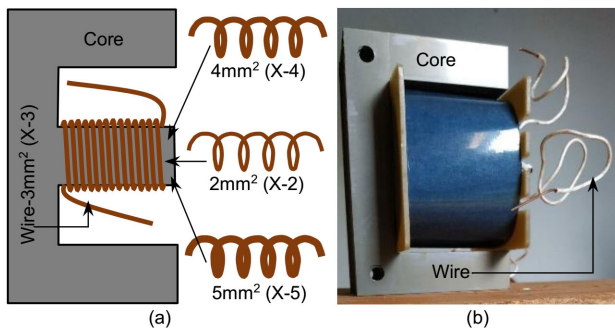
Construction of the stator: (a) CAD drawing and (b) the prototype.
